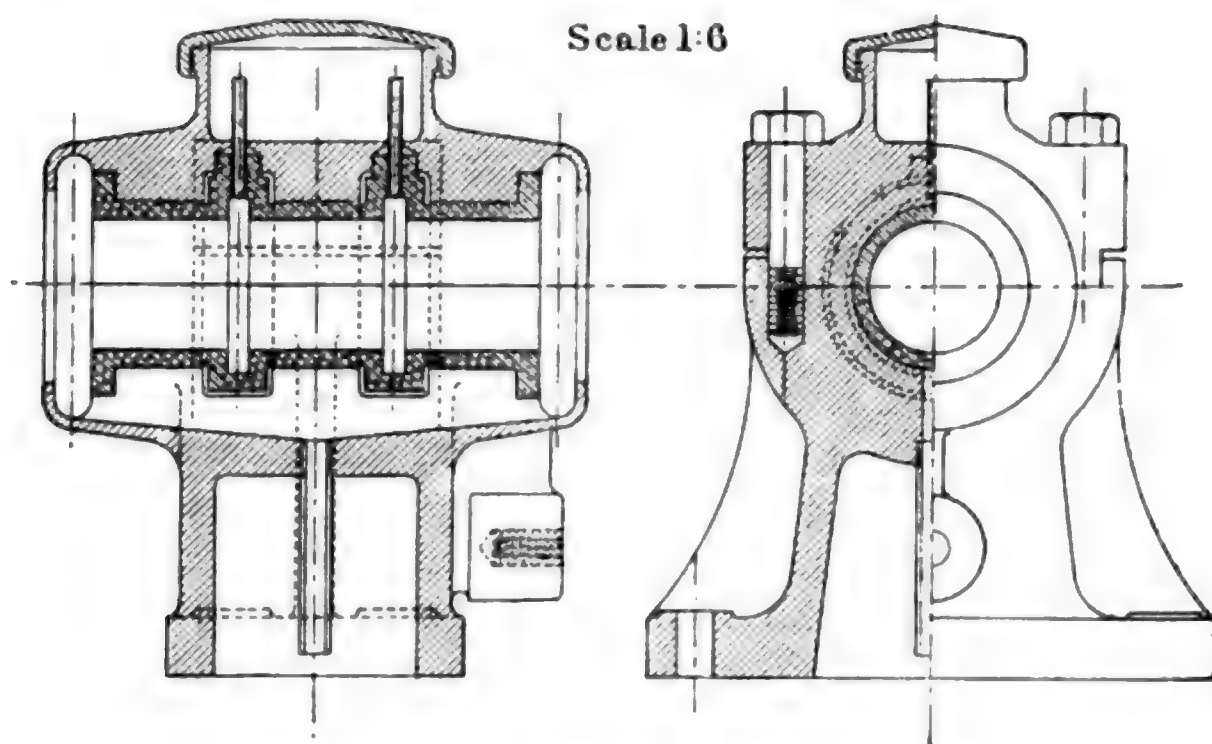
THRUST BEARING OF KAPP ALTERNATOR.
